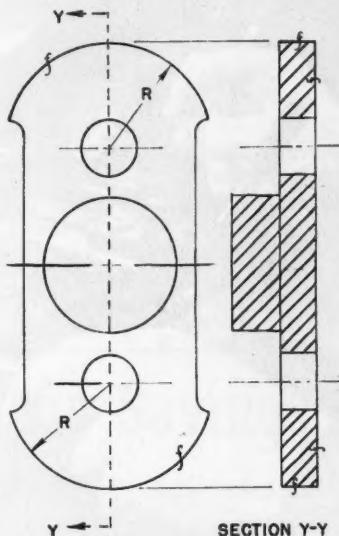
Sample of work so designed that two end arcs are required to be finished on a cast iron workpiece in a "Swing" Milling Fixture.
